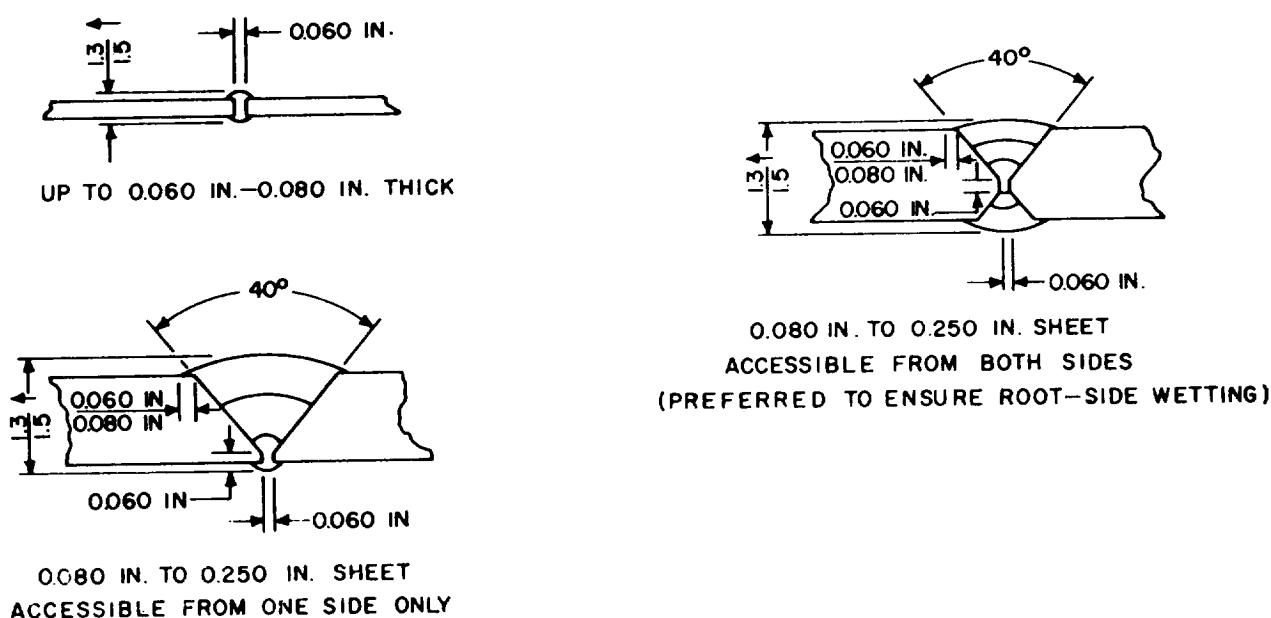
Typical Braze-Welding Joints⁷³
